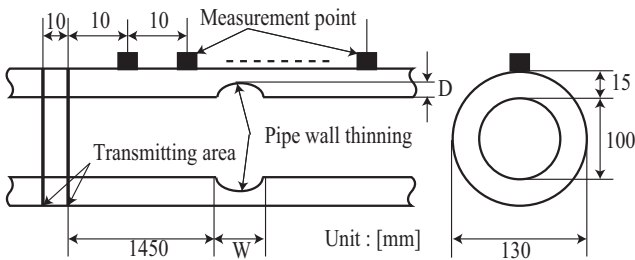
Longitudinal sectional view of test pipe model and its dimension(ellipse shaped circumferential defect).
